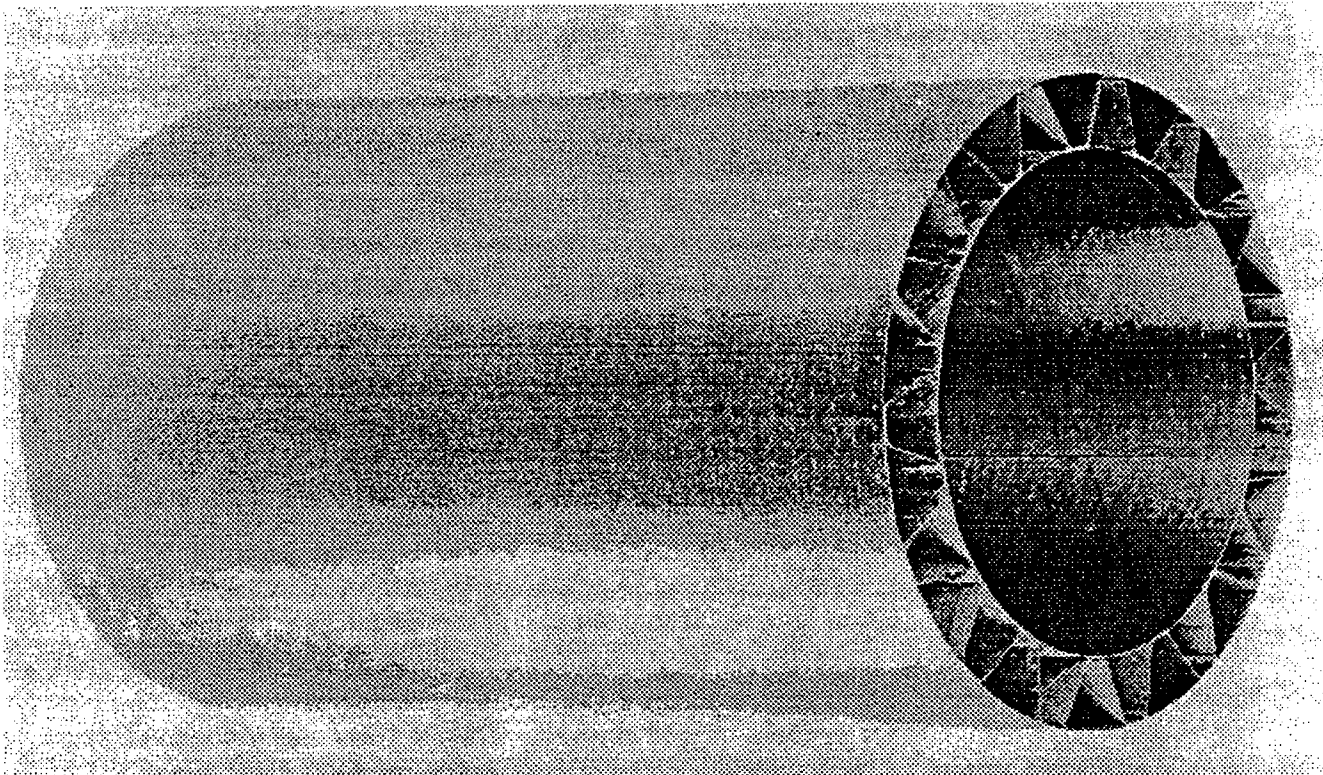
Sandwich construction shell demonstrating sparse, truss core geometry.
